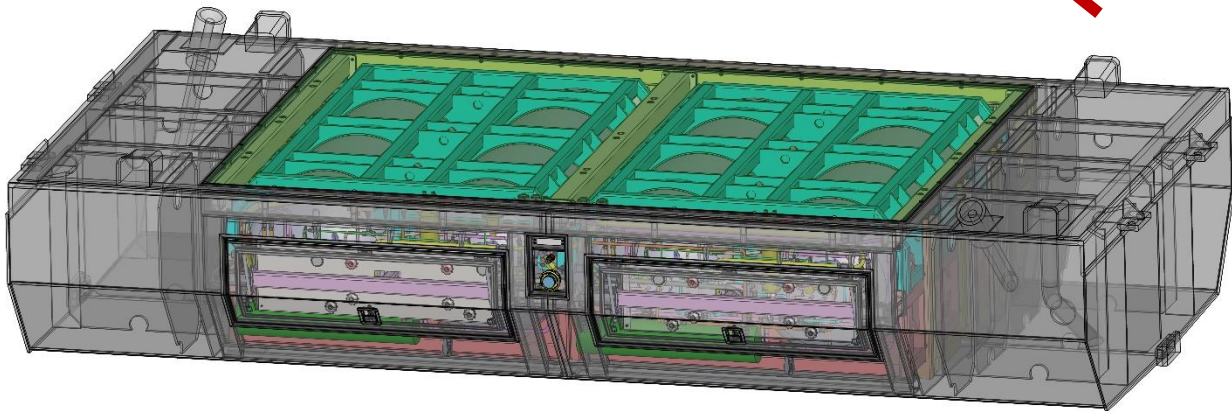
LNG storage and supply system installation example (4 x 1000l LNG tanks), inner view
